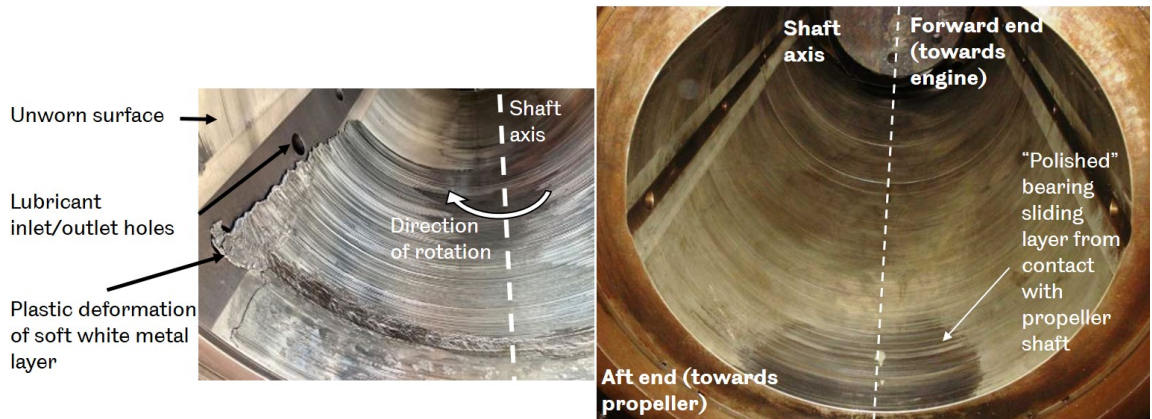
“Wiped” aft stern tube bearing (left) [57] and “polished” aft stern tube bearing (right) [58].
